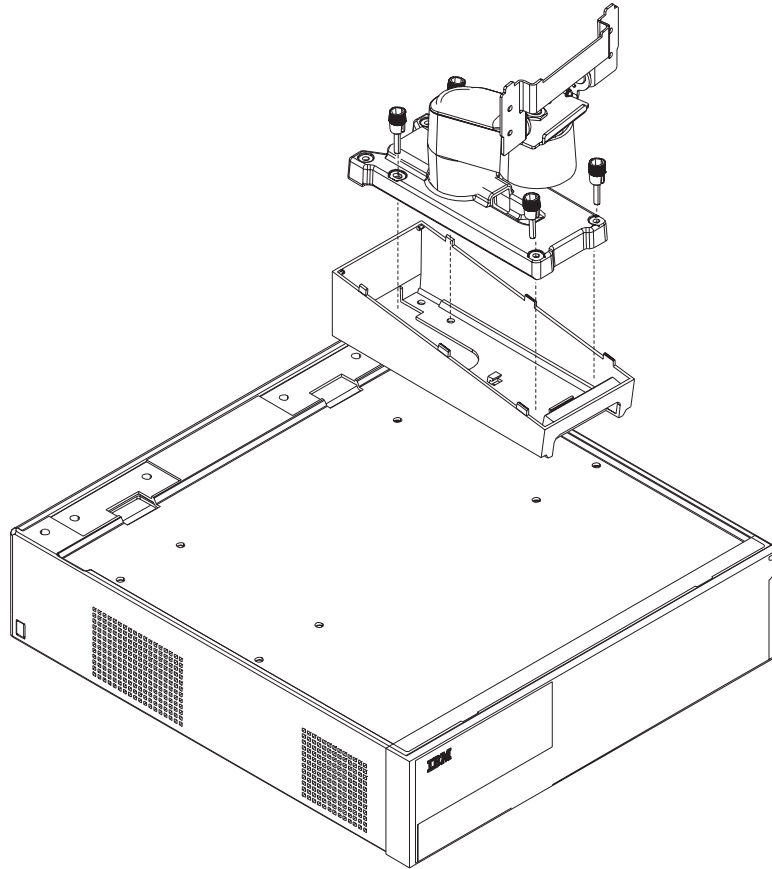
Securing the arm assembly to the SurePOS 720, 740, 780
